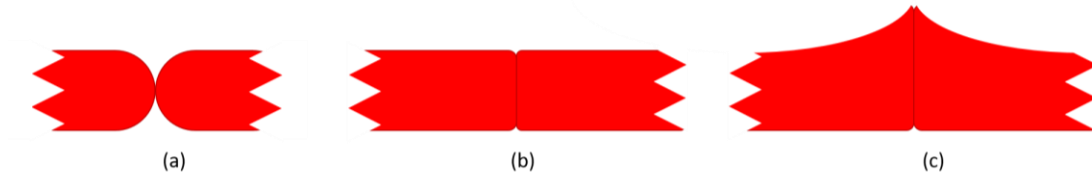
Extrusion examples in FDM printing. (a) Under-extrusion. (b) Proper extrusion. (c) Over-extrusion.
